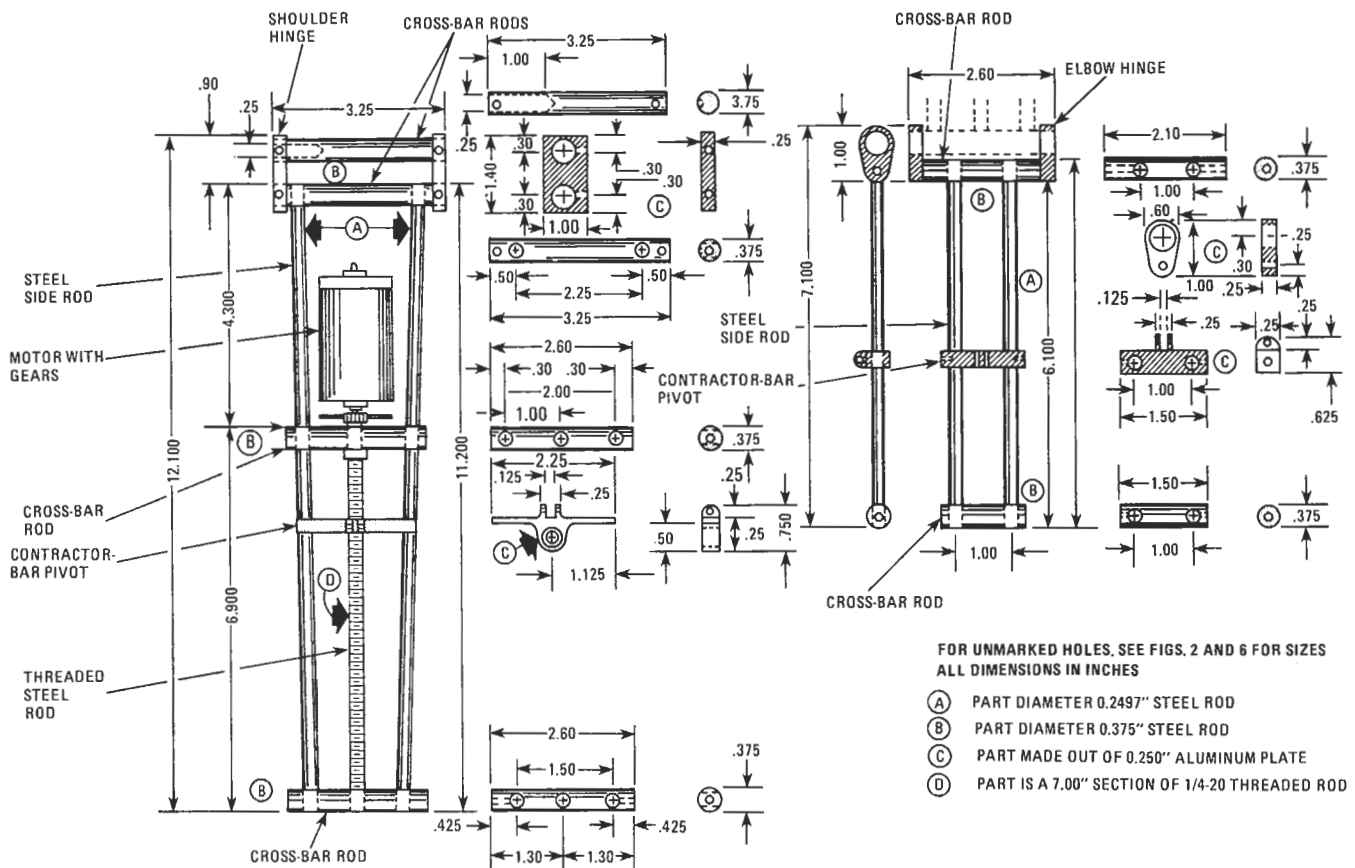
FABRICATION AND ASSEMBLY details of the manipulator. It would be a good idea to make a copy of this and keep it near your workbench for reference.
